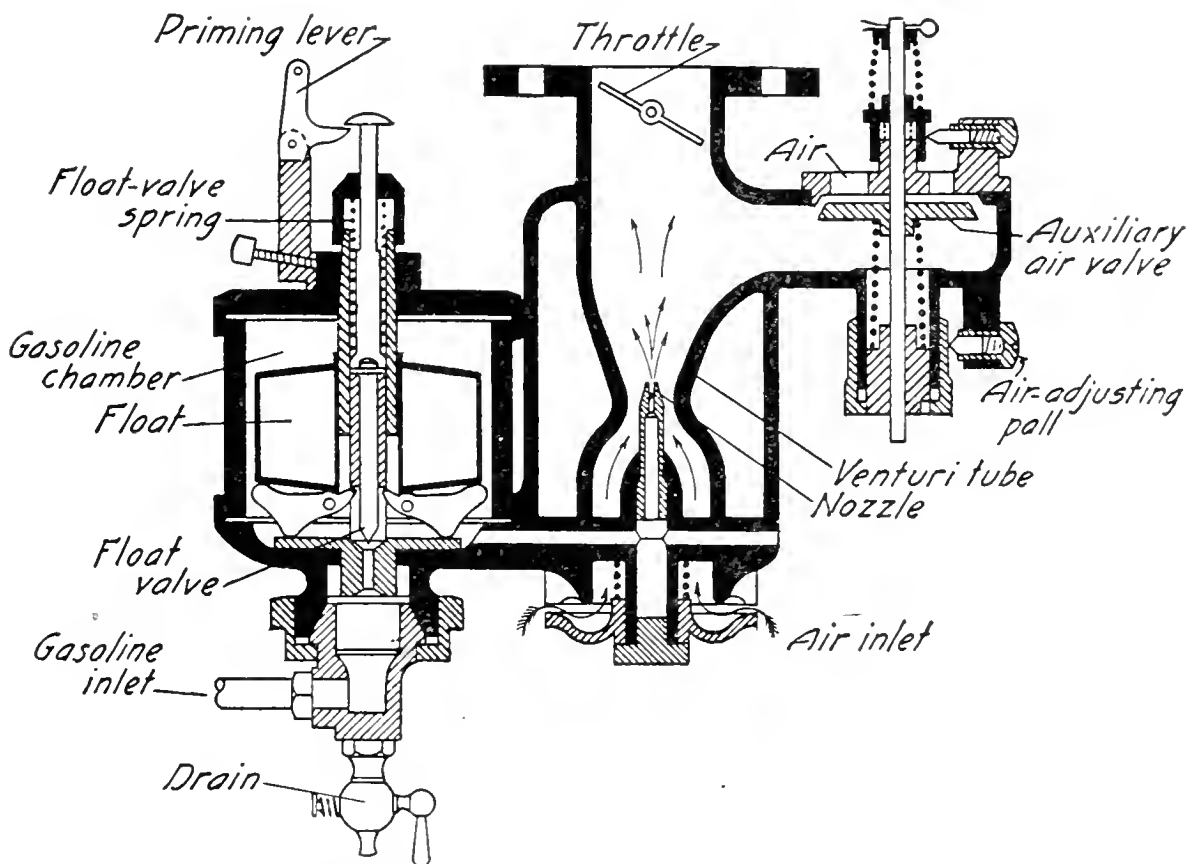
A commercial carburetor of the spray-nozzle type (Stromberg)
